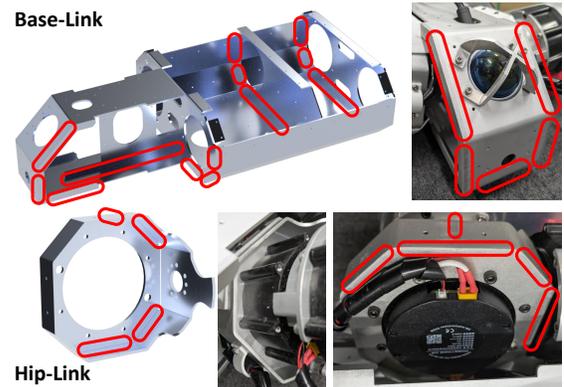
Details of sheet metal welding for the Base-Link and Hip-Link. The welded sections are highlighted in red.
